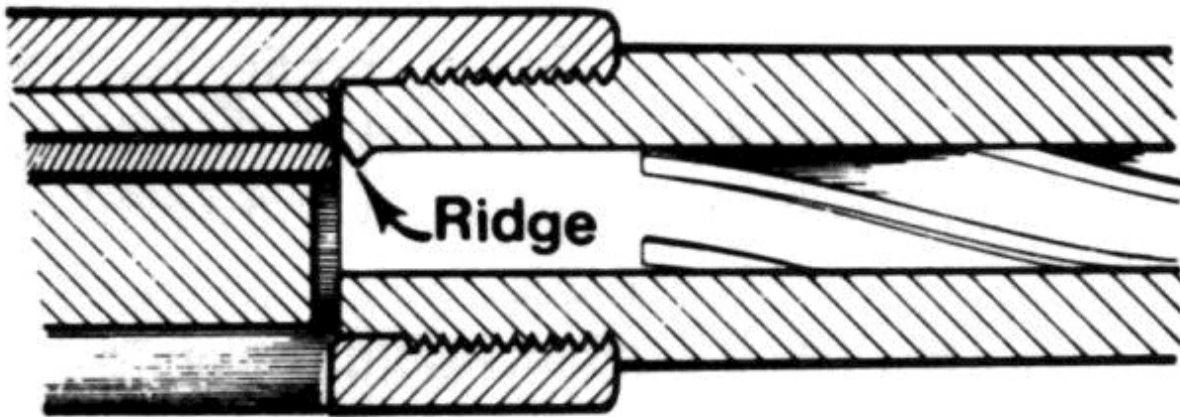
Dry-firing a .22 rimfire rifle can turn a heavy burr into the chamber, causing extraction and ignition problems.
